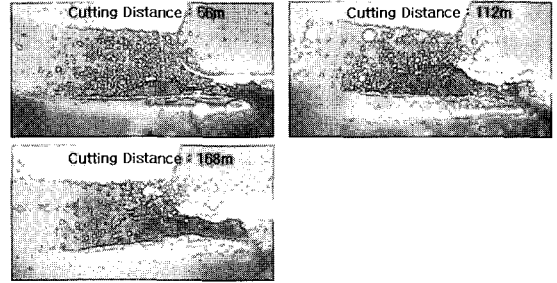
Photographs showing progress of wear on the flank surface of $\Phi 1\text{mm}$ ball endmill for $V_c=40\text{m/min}$ ($a_p=0.05, a_e=0.1, f_z=0.03$)
